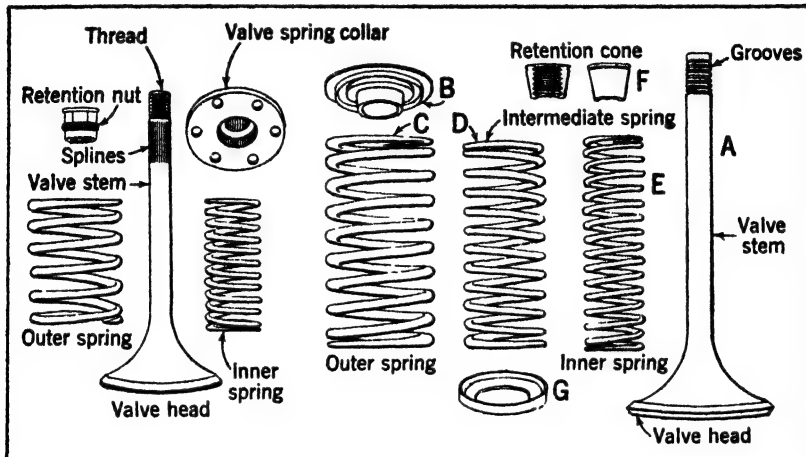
Double and Triple Valve Spring Arrangement and Method of Valve Spring Retention Used on Aviation Engines.
